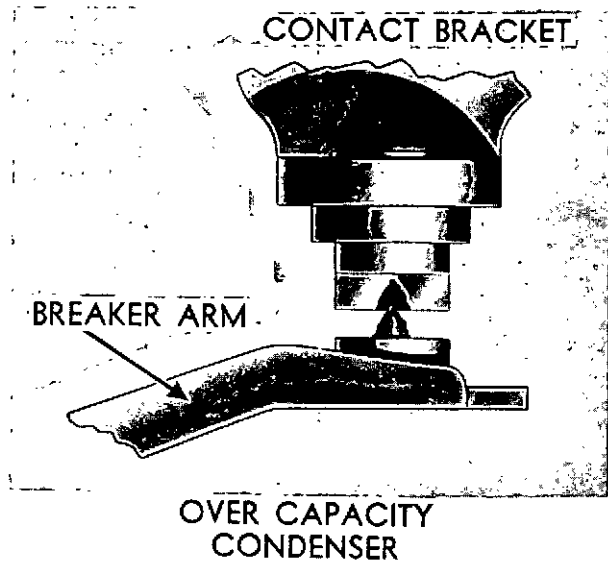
Badly pitted breaker points caused by arcing due to incorrect condenser capacity
